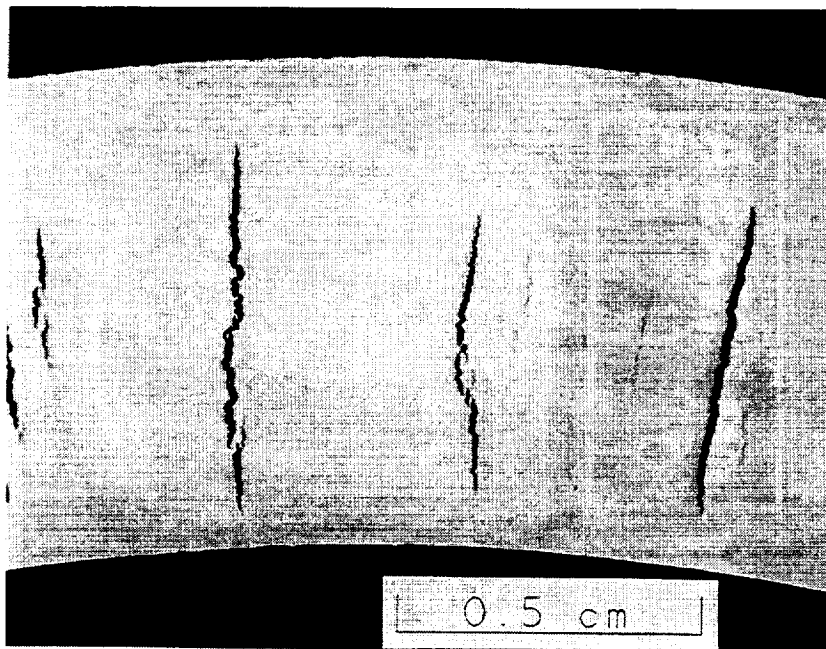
Sub-surface Cracking in Contractor-welded Pipe -
